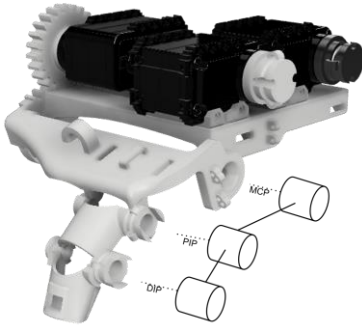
CAD drawing of the hand exoskeleton with the three actuation joints.
